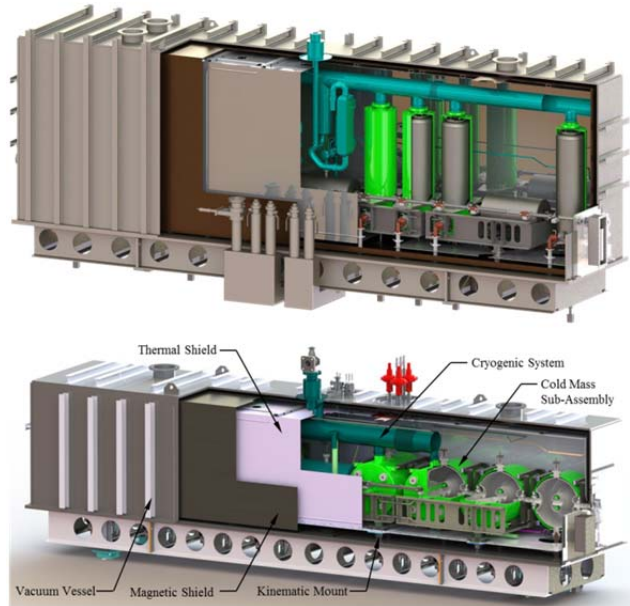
FRIB “bottom-up” cryomodule designs. The top cryomodule incorporates 8  $\beta=0.085$  QWRs, 3 solenoids, and 3 cold beam position monitors; the bottom cryomodule incorporates 8  $\beta=0.53$  HWRs and a solenoid.
